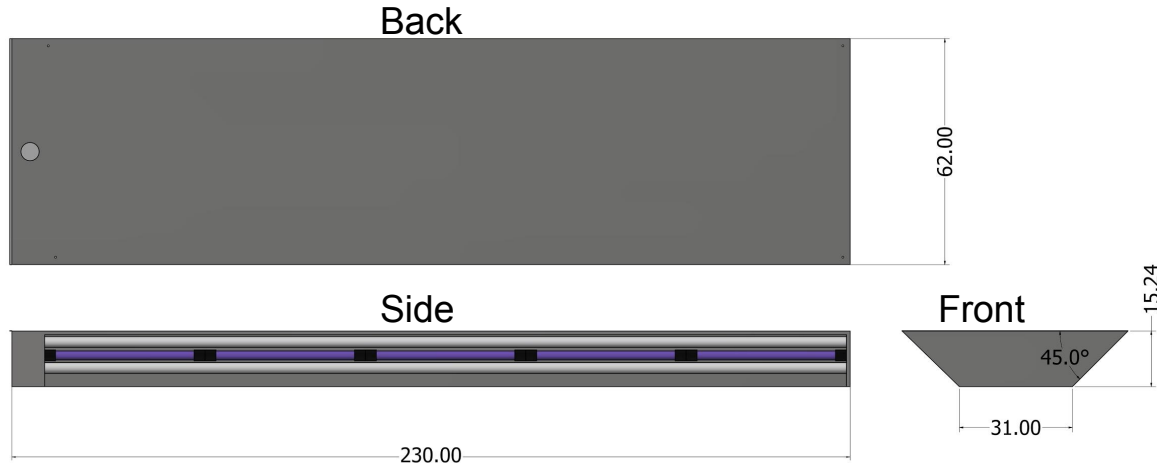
Back, side, and front views with dimensions in cm and angles in degrees
